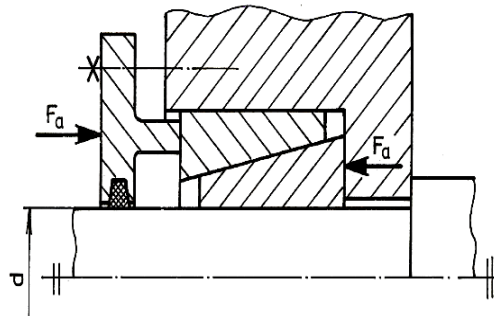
Assembly with a pair of conical rings with axial support off the hub
